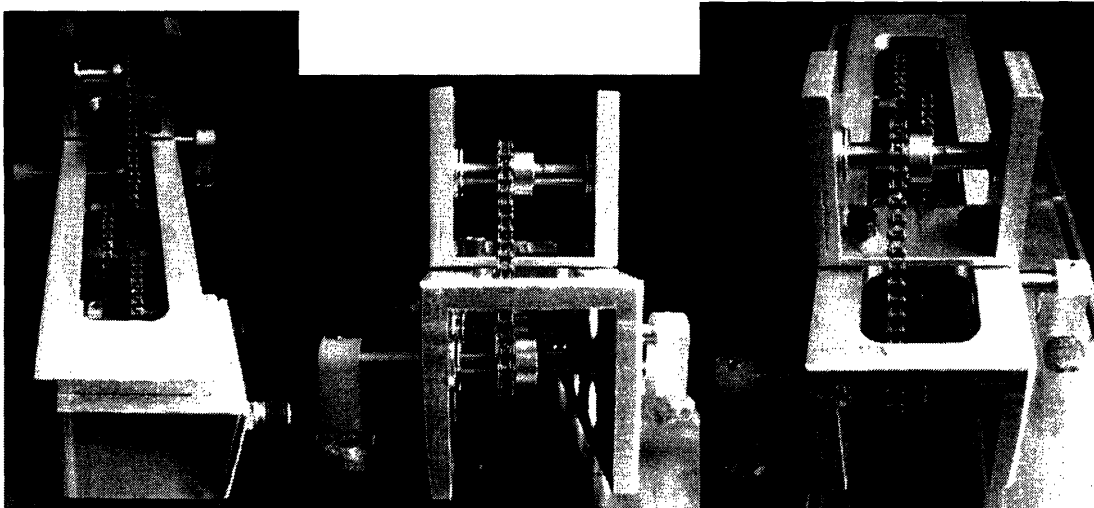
CDVP chassis differs from DDVP chassis with webbing removal and outboard idler pulley.
